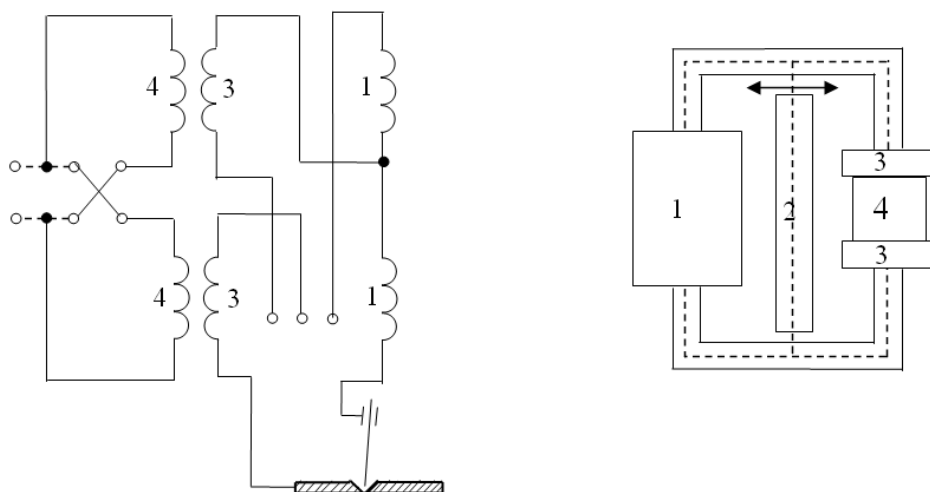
Scheme of a welding set with a movable magnetic shunt:
